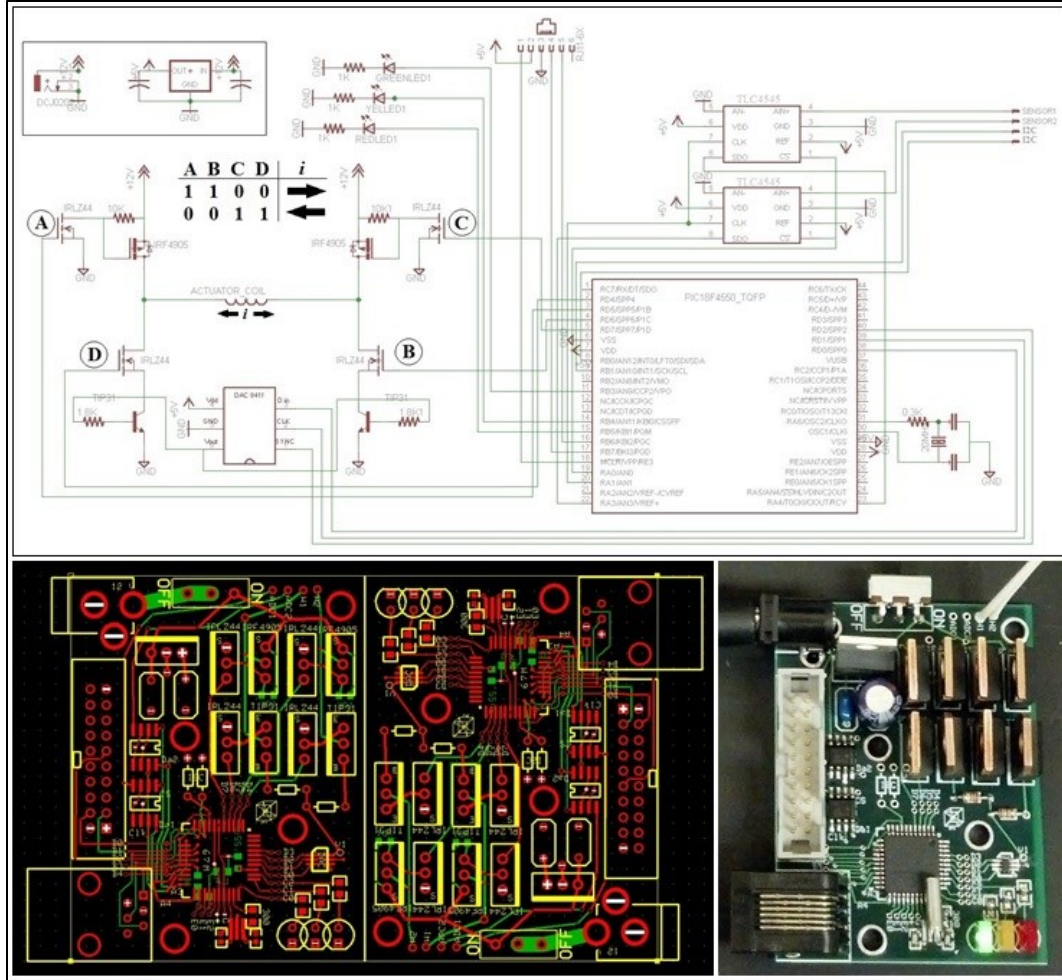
(Top) Circuit schematic of the VCA system (Bottom Left) PCB designed using ExpressPCB freeware (Bottom Right) Populated PCB
